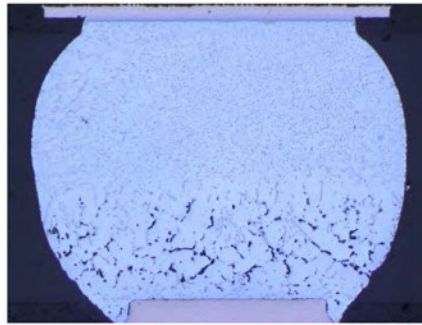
BGA solder joint: mixed metallurgy (lead-free alloy in a tin/lead process).
